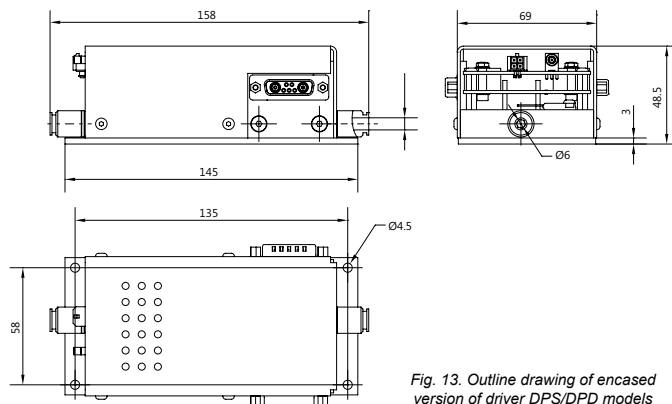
Outline drawing of encased version of driver DPS/DPD models
